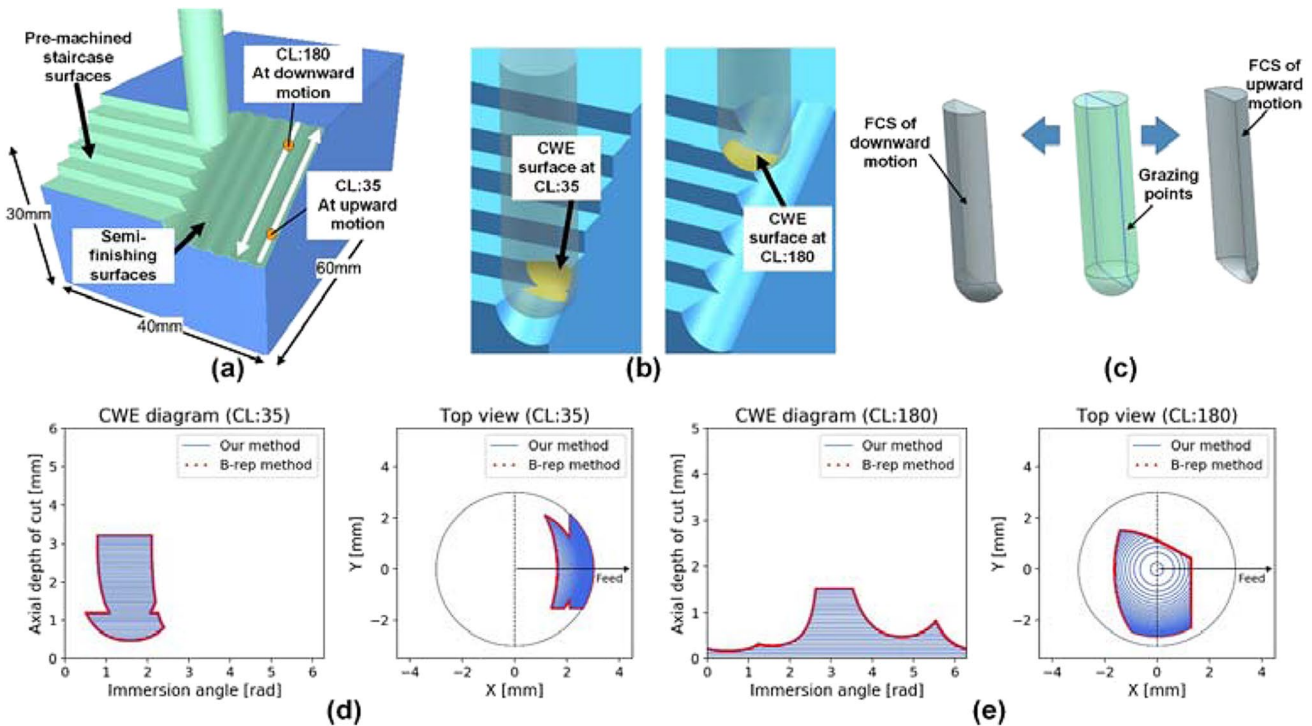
The staircase workpiece previously machined by a flat-end cutter
